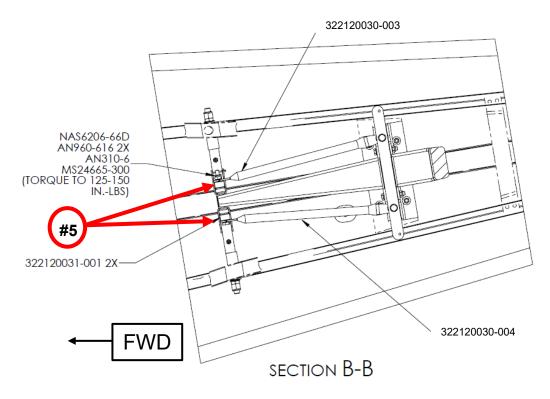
Fwd Tail Mount Struts Installation (View Looking Up Under Belly Skin)
